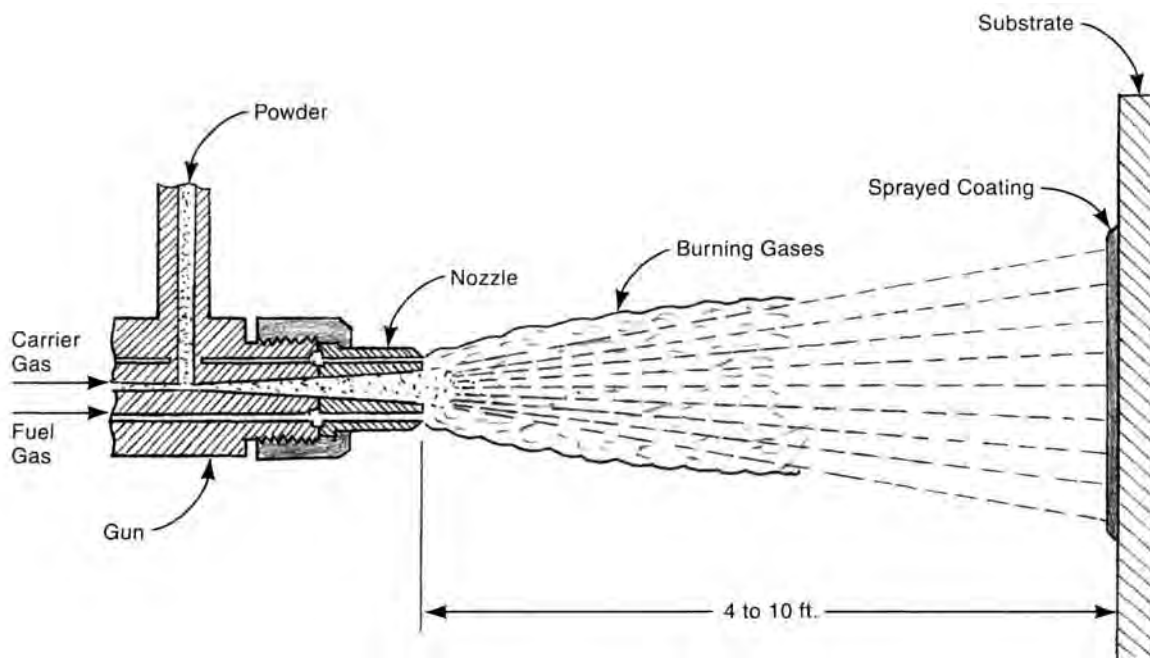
F4b Cross section of a typical gun for thermal spraying powdered metals, ceramics, cermets and carbides to a metal workpiece surface.
